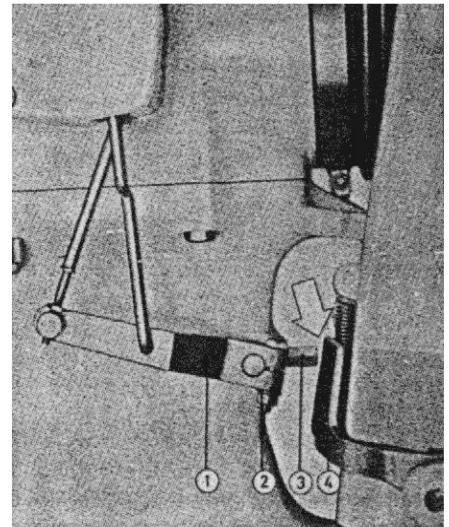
Aquamatic 100 units with a tapered friction clutch can be identified by crossed shift arms as shown. Adjust reverse pin gap as outlined in Fig. 2-1.
